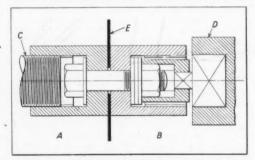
Method of Testing Bolt and Nut Combinations. A. Tensile Test. B. Tightening Test. C. Tension Rod of Tensile Testing Machine. D. Grip of Torsion Testing Machine. E. Plate for Detecting Joint Separation
